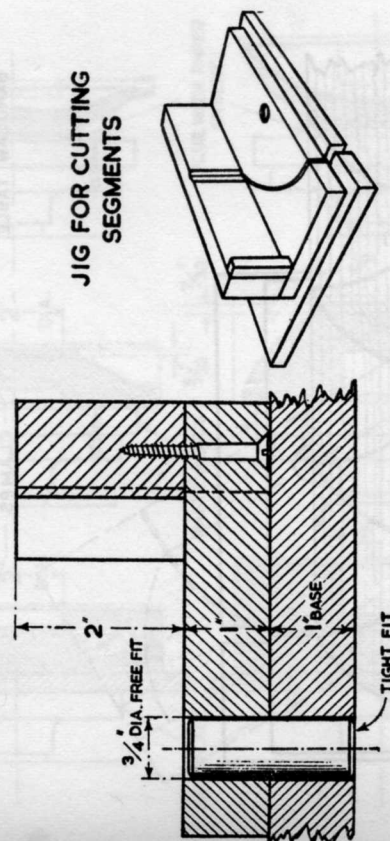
SECTION THROUGH JIG; ALSO COMPLETED JIG
